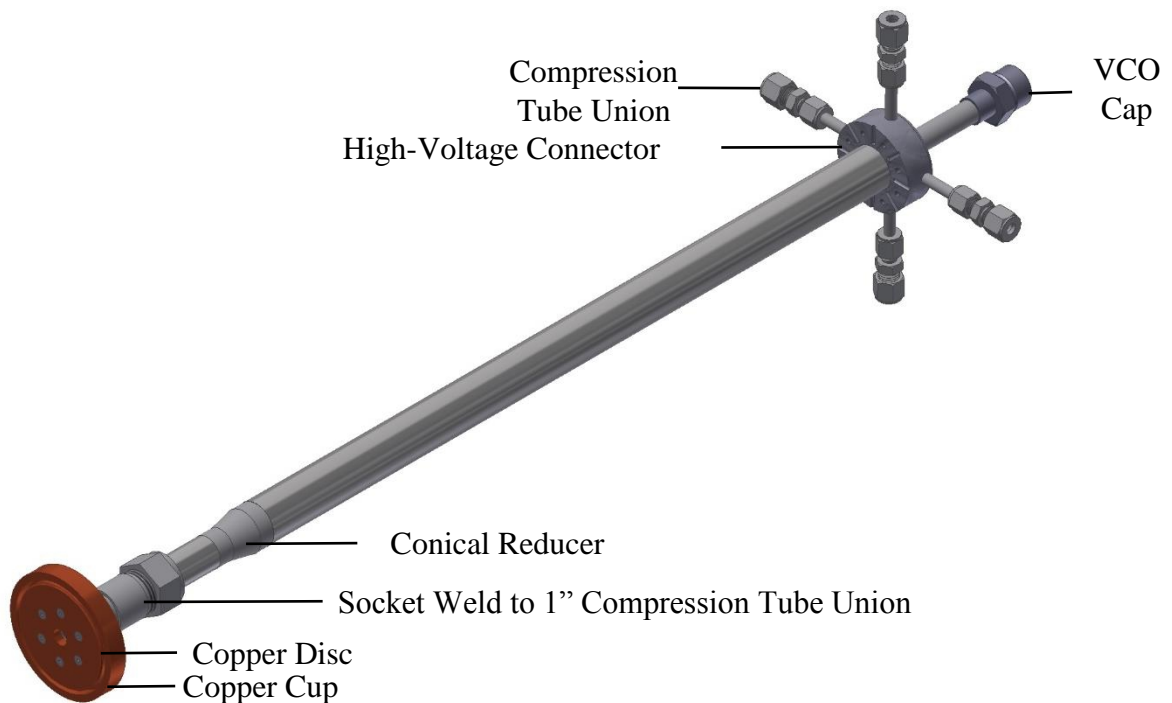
Inner Electrode Assembly. The inner electrode assembly consists of two stainless steel tube assemblies terminating into two copper electrodes – a copper disc and a copper cup.
